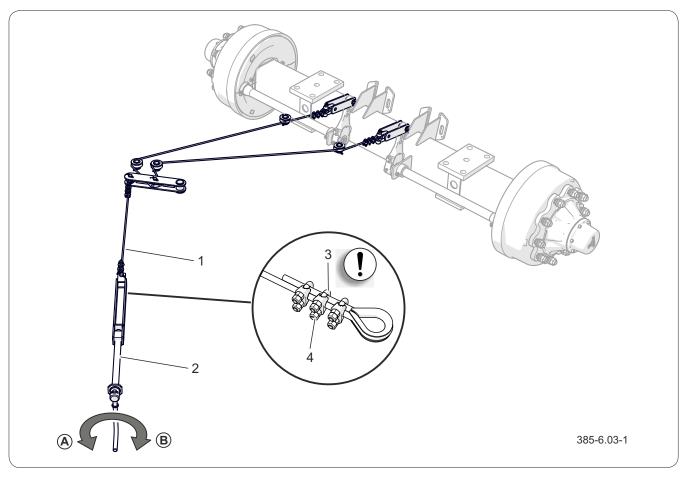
Cable tension inspection (1) cable, (2) brake mechanism, (3) bow clamp, (4) clamp nut
